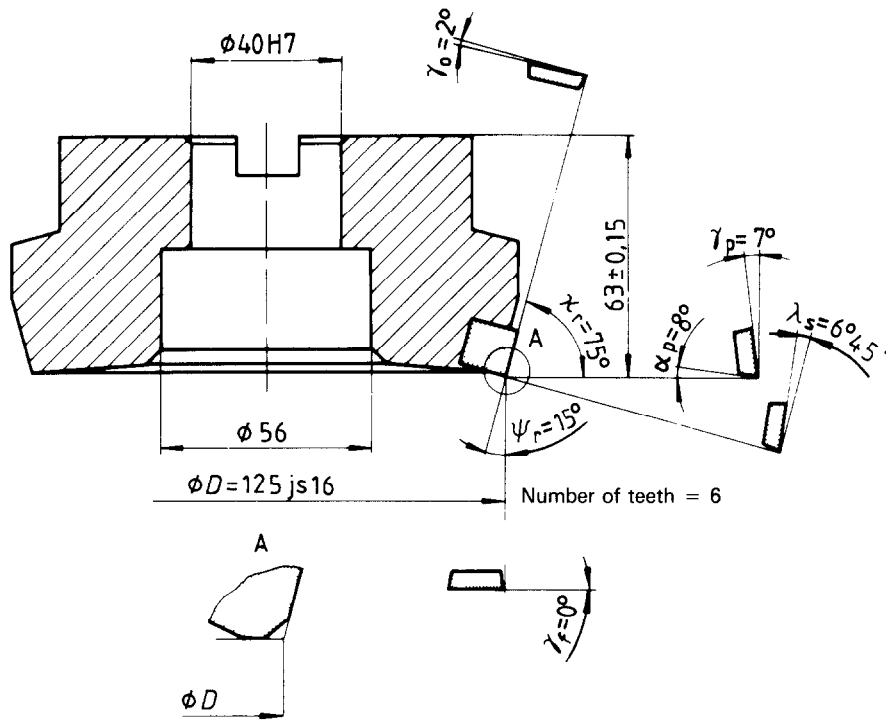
Face milling cutter with hardmetal indexable inserts
